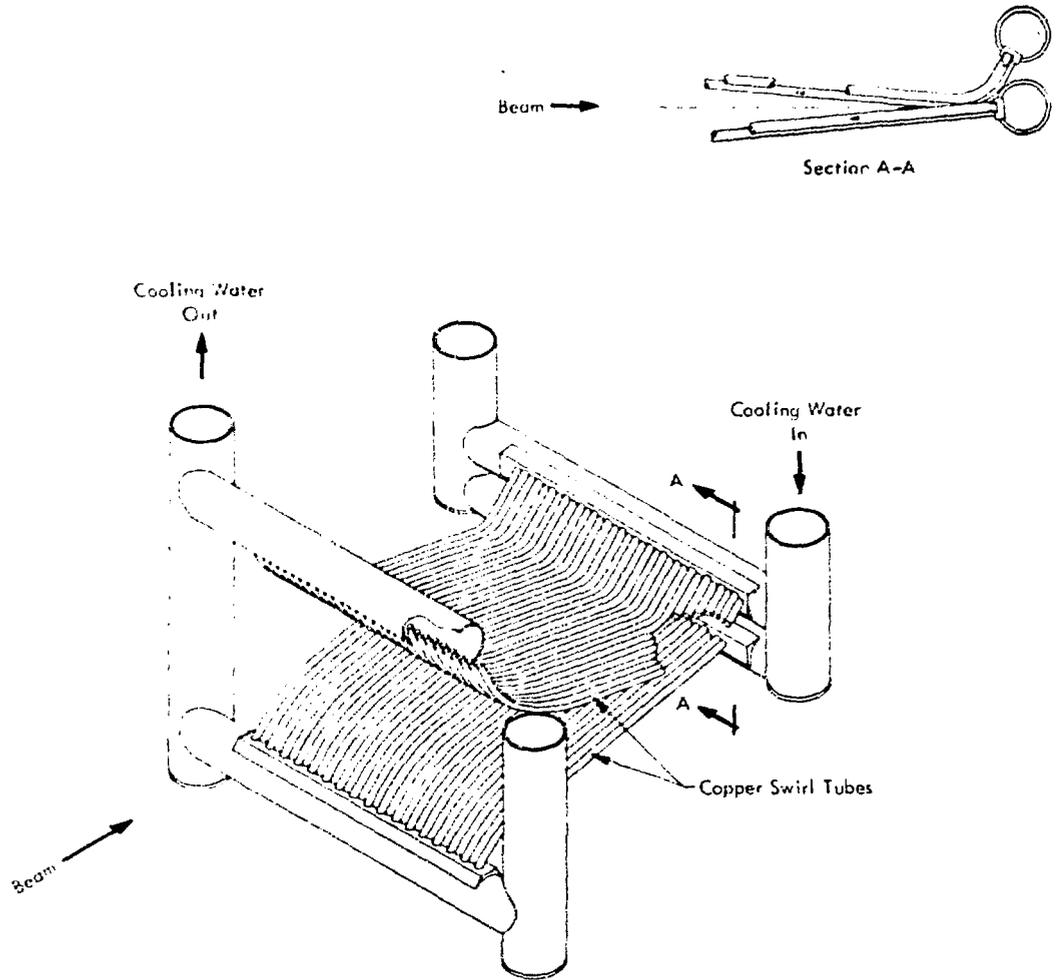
,10 TYPICAL TARGET SECTION OF CALORIMETER ASSEMBLY
